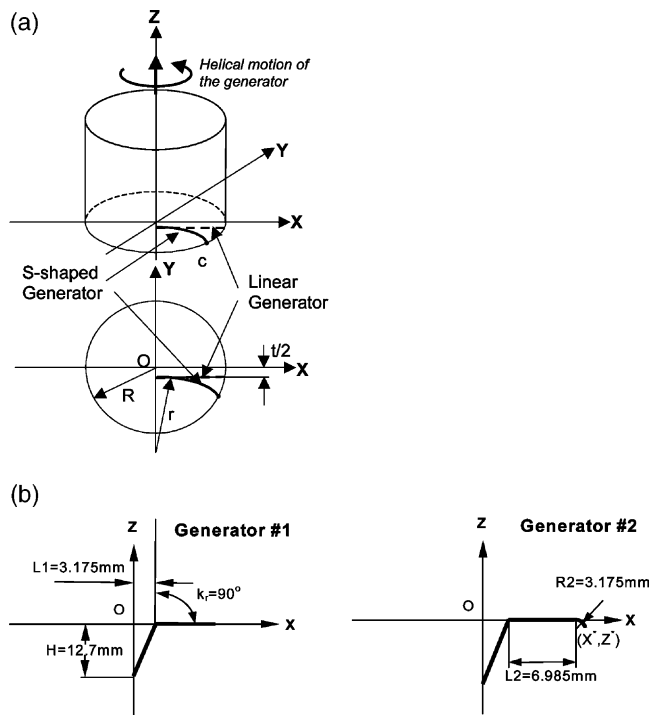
Definition of generators: (a) helical rake surface generator, (b) clearance/flank surface generators.
